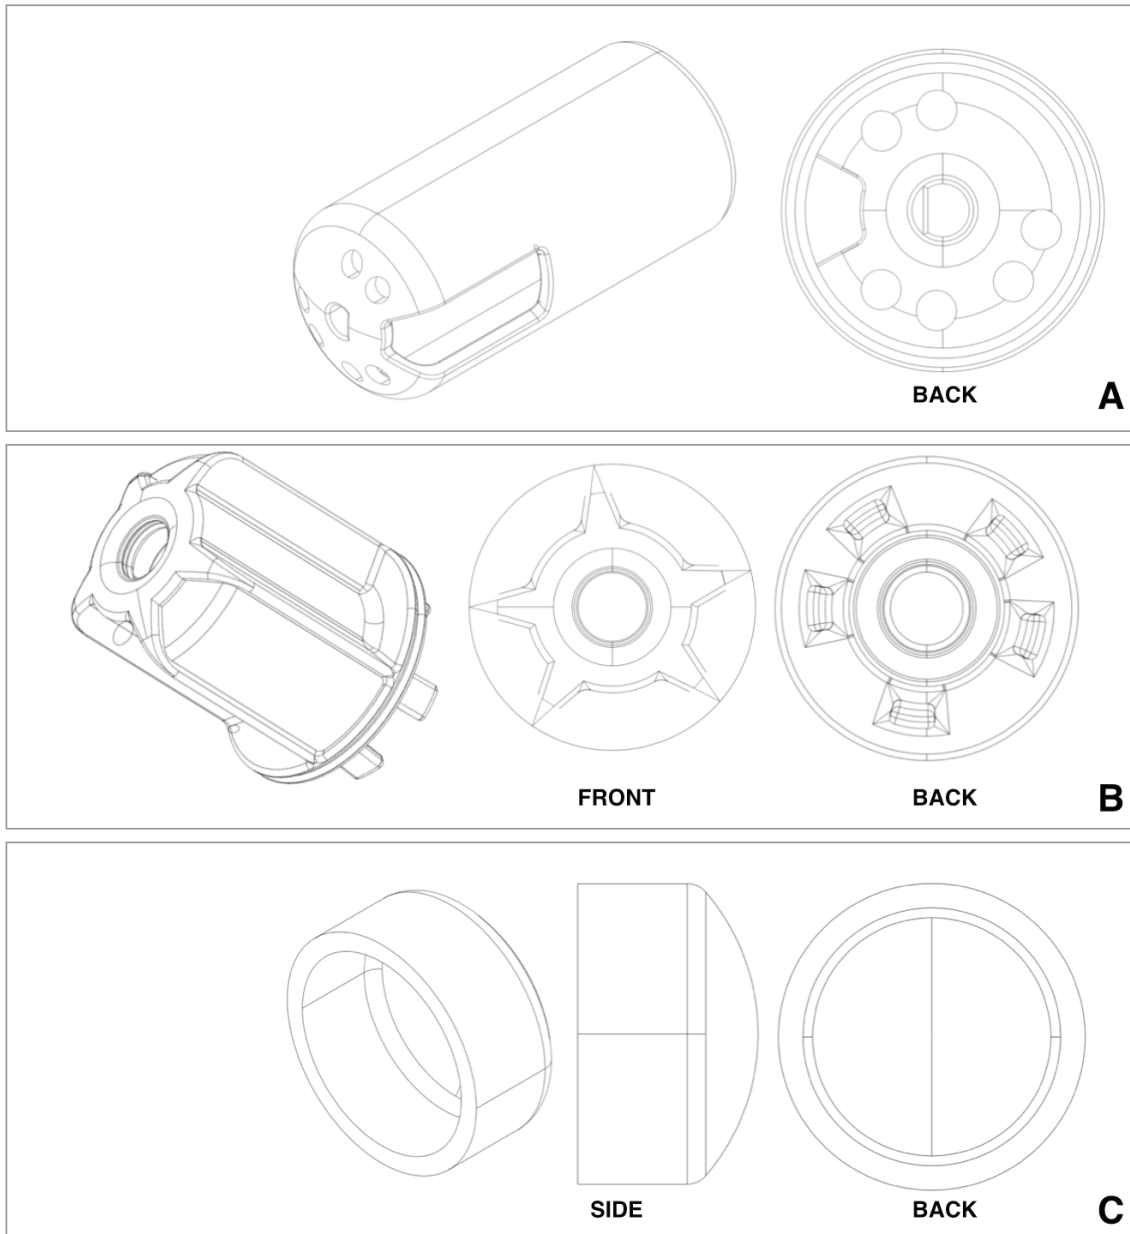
Mechanical design of Embodiment B Exterior shell (A), Sampling Body (B), and End Cap (C)
